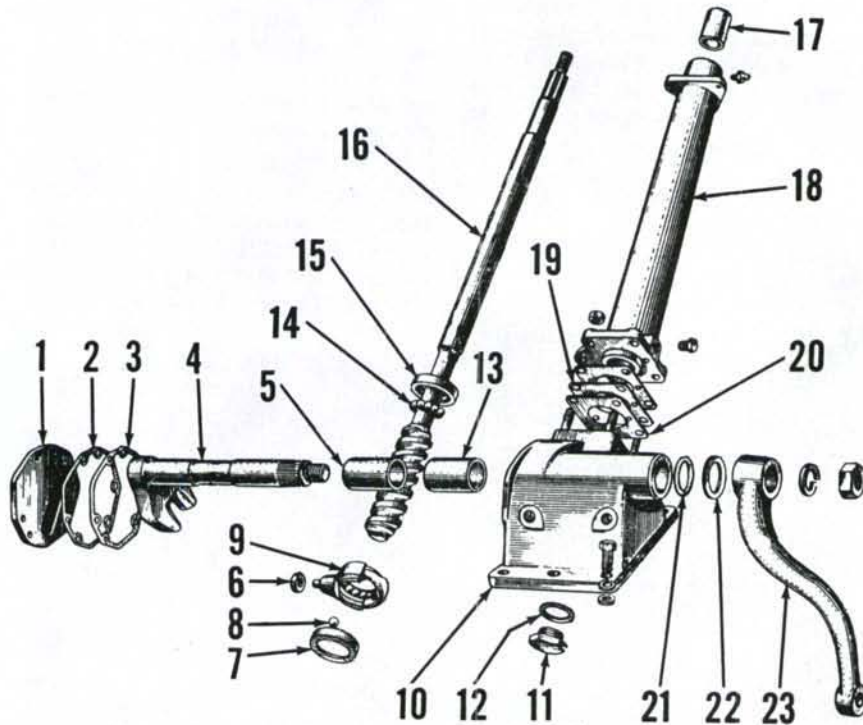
Exploded view of typical steering gear assembly for adjustable front axle models. Tricycle steering gear is same as that shown except that a different drag link is used. Steering column (18) for "FMD" models does not have instrument panel support and different wormshaft (16) is required. Late production oil seal (21) does not require retaining ring (22).
